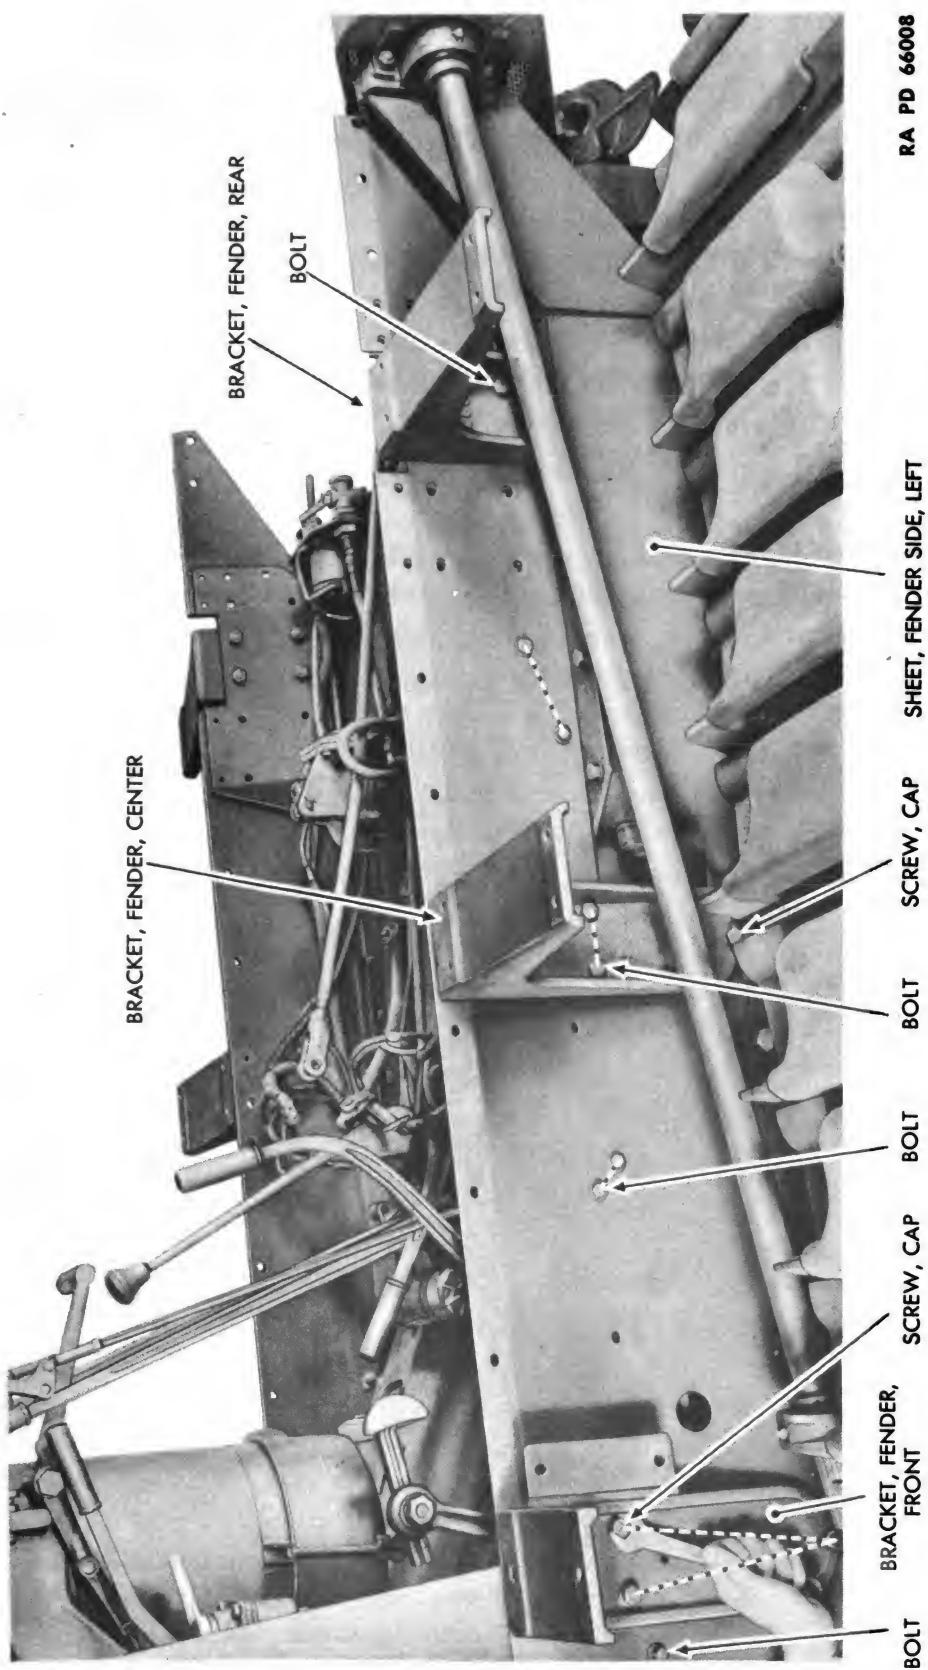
Left Fender Brackets and Left Fender Side Sheet Removal
